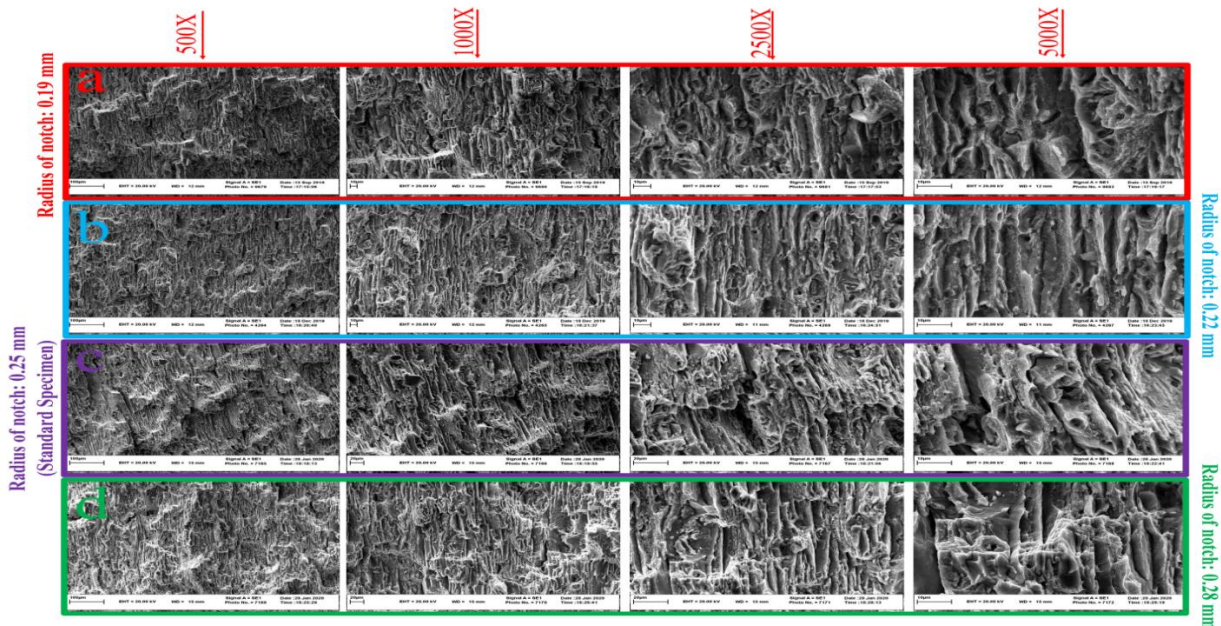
Fracture surfaces for tasted samples (range from 0.19 to 0.28 mm).
